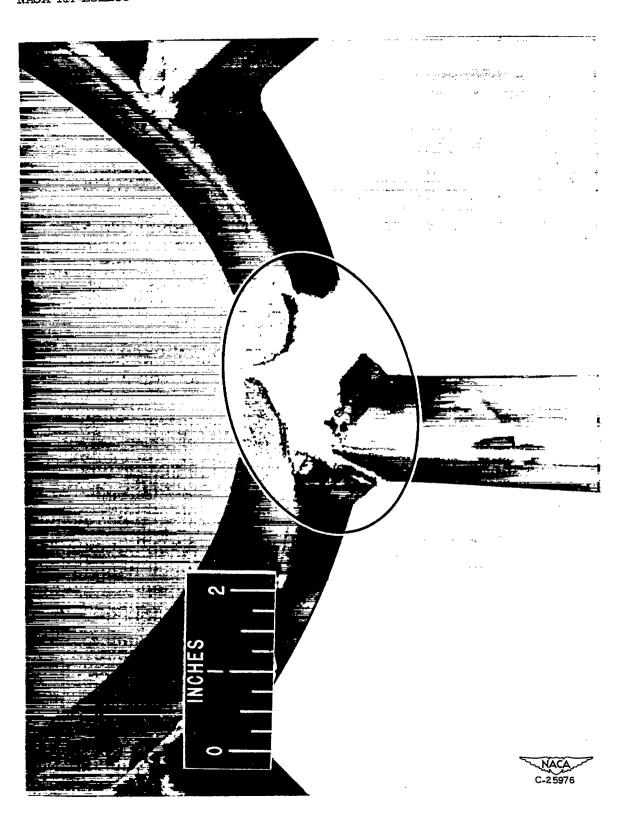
Typical V-gutter failure at a gutter intersection.
